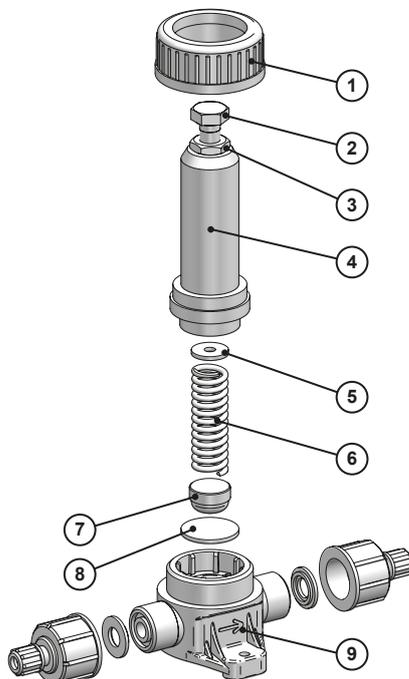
Exploded diagram of the back-pressure and pressure-relief valves DN6 - DN15
